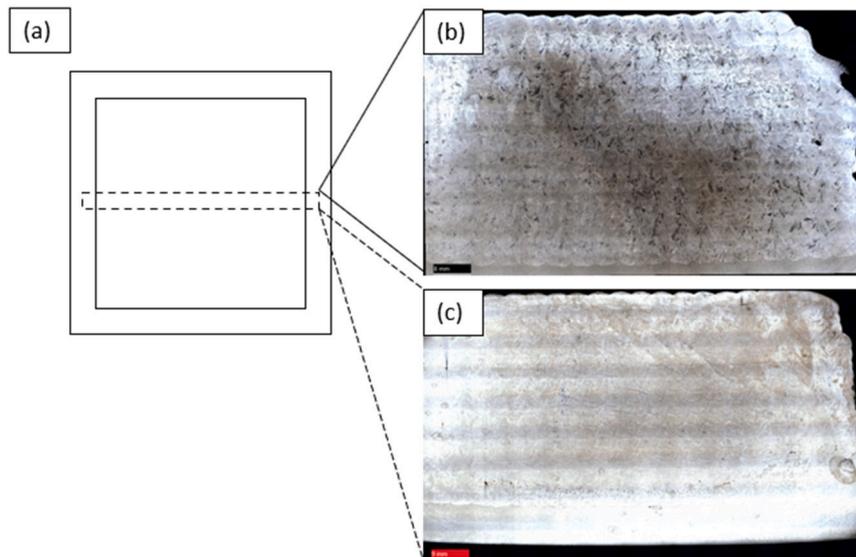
Macrographs of the block sample manufactured (a) schematics of the cutting location (b) without ultrasonic processing and (c) with ultrasonic processing.
